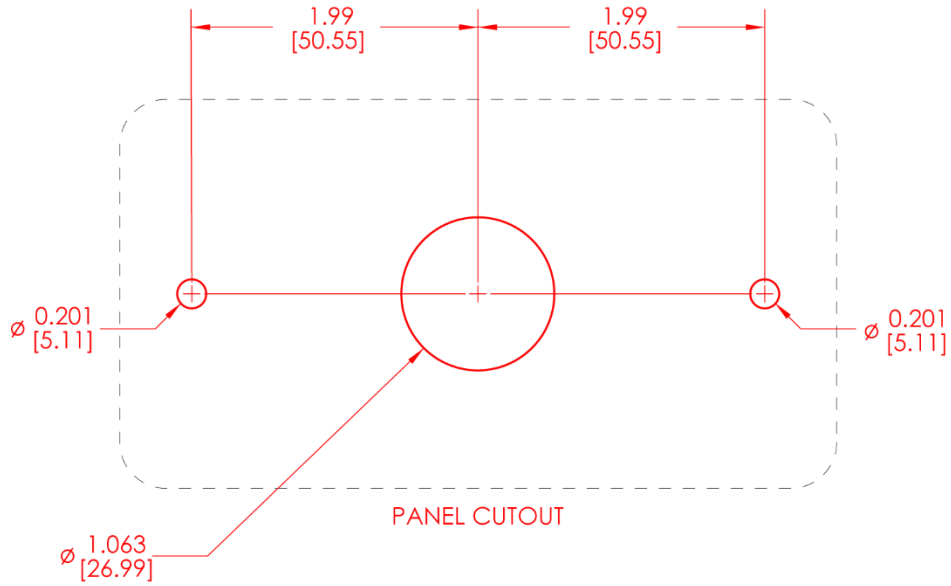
SmartTOUCH, 8 position installation dimensions in inches [millimeters].
